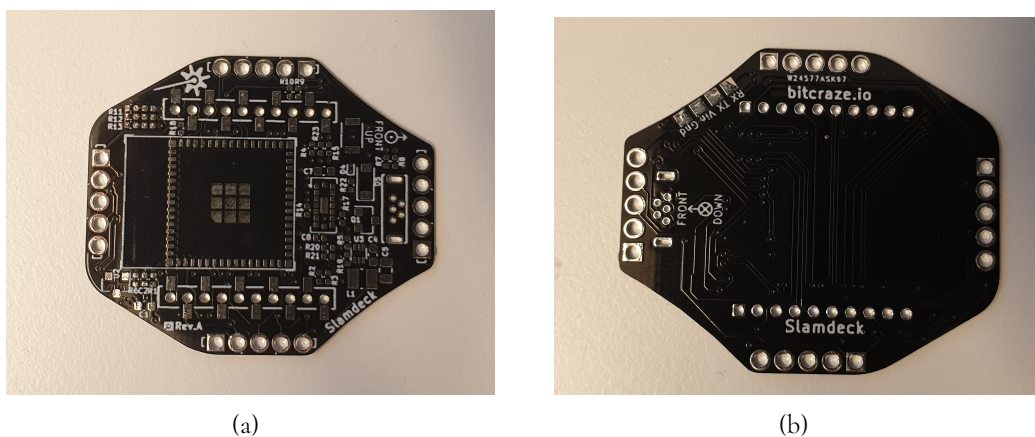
Prototype main PCB. (a) Front side. (b) Bottom side.
